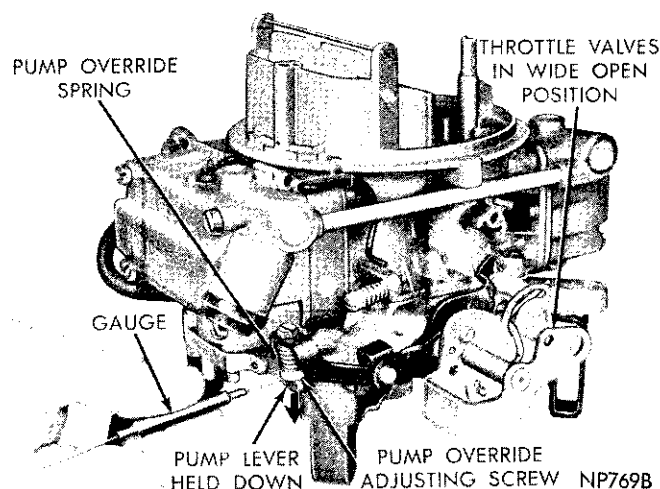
Checking Accelerator Pump Lever Clearance Qualifying Choke Control Lever
